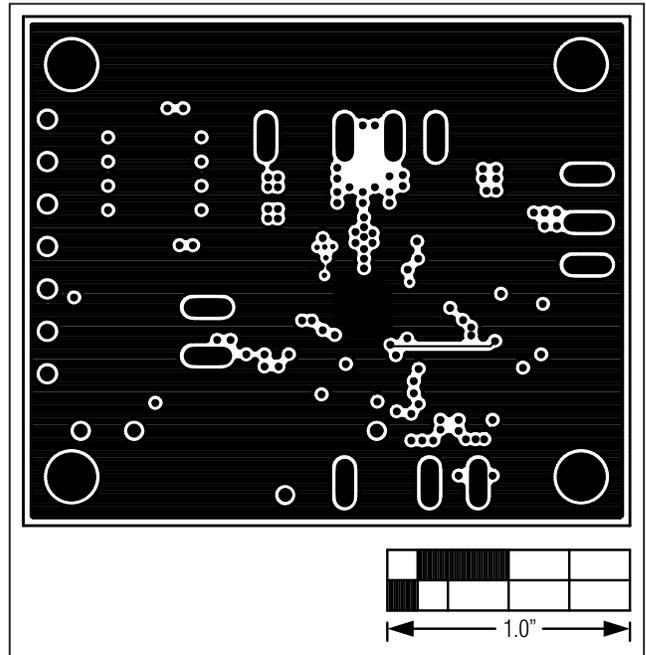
MAX17019N EV Kit PCB Layout—Layer 2
